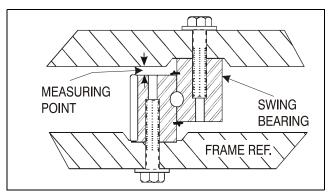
Swing Bearing Tolerance Measuring Point
